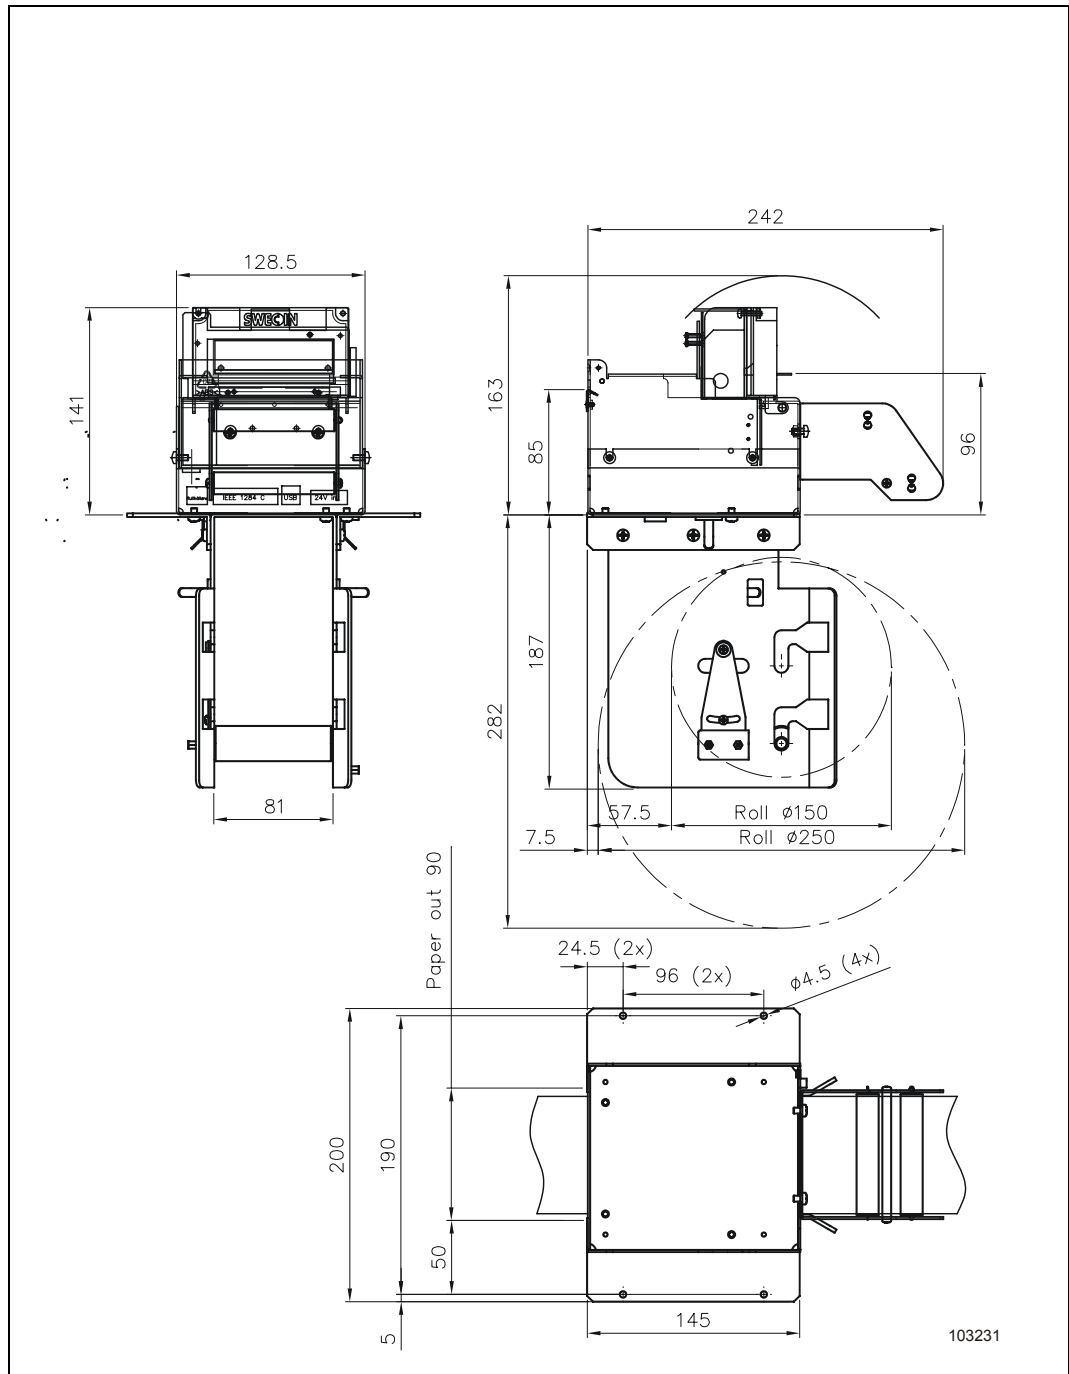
Roll holder 01754-080 for paper placed under TTP 70x0/080. The roll can be fitted on two different levels, one for 150-mm roll, and one for 250-mm roll. This way, minimal space is required under the printer.
